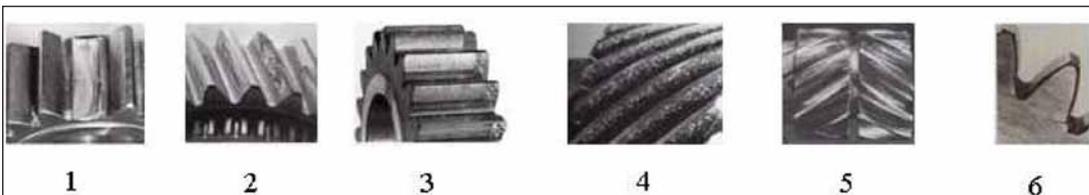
Modes of a gear failure: 1) vibration fatigue; 2) macropitting; 3) scuffing; 4) wear; 5) spalling; 6) crack at the root diameter due to bending stress (Refs. 4 and 8).
